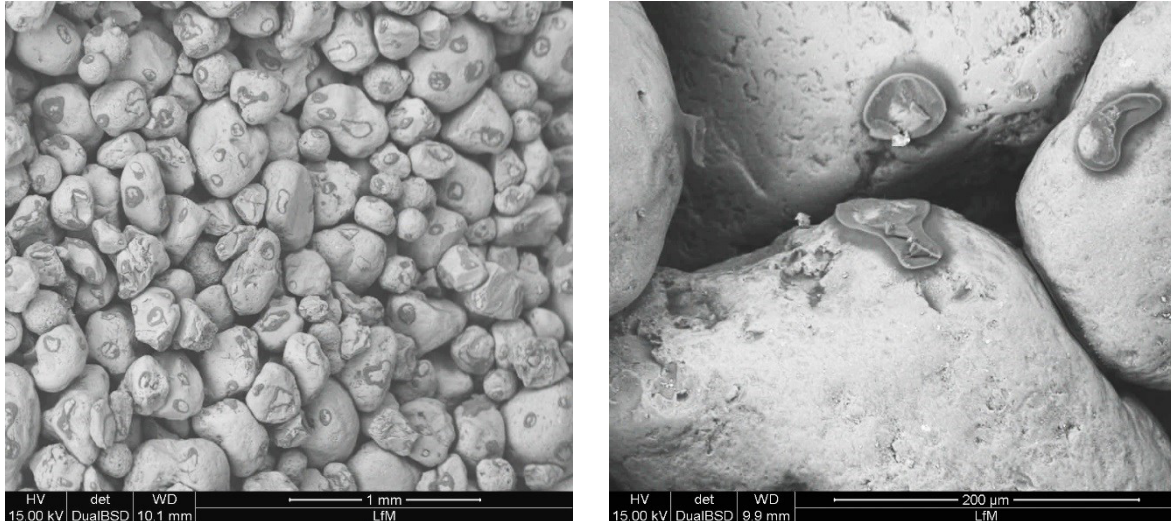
Sand core fracture surface illustrating the grains and the bonding binder patches. Silica sand and a urea-furanic based, Warmbox bonded resin were used. The sample was taken from a cast-in sand core [34].
